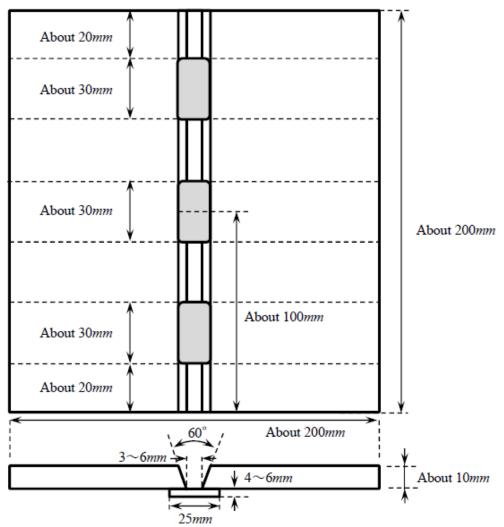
Dimensions of Plate Test Assemblies for Butt Welding Using Tack Welding
